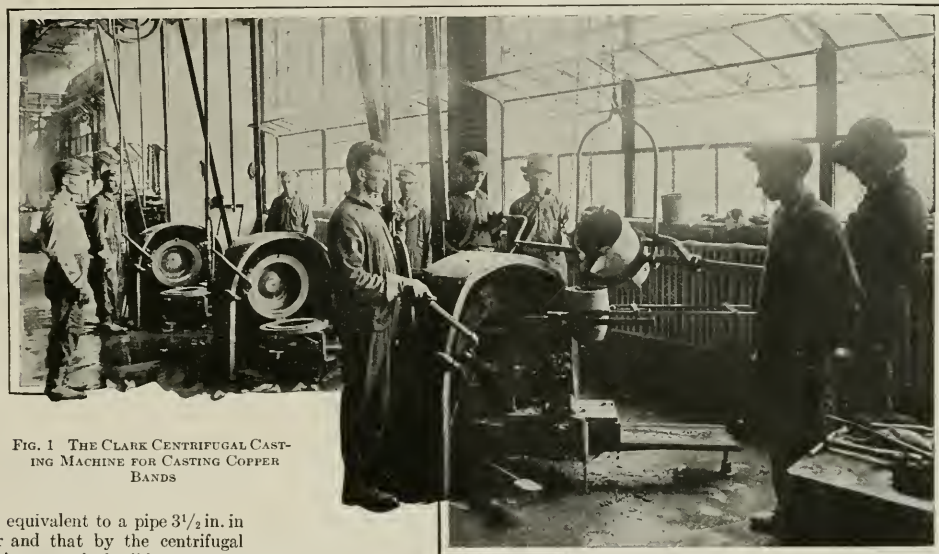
THE CLARK CENTRIFUGAL CASTING MACHINE FOR CASTING COPPER BANDS
